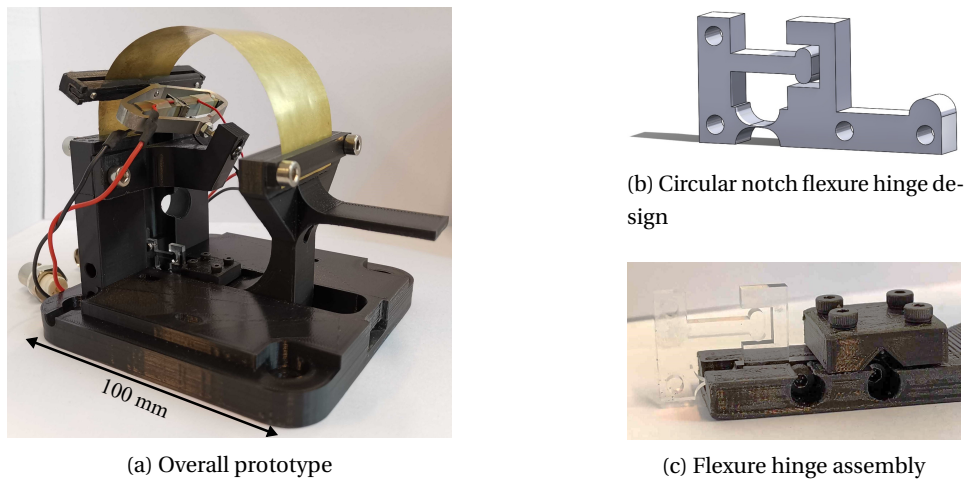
Prototype for active damping and glass flexure hinge assembly testing
